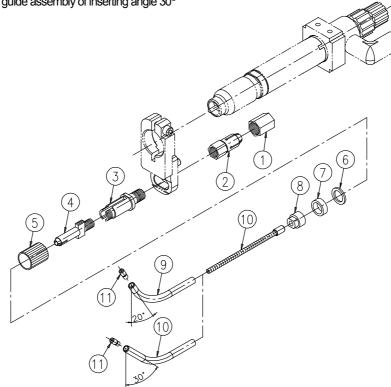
Wire Guide Assembly (1)  $\sim$  (12) Parts List (Aluminum )
